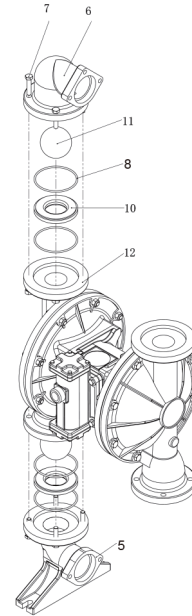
Disassembly of Check Valve (Ball & Seat)
